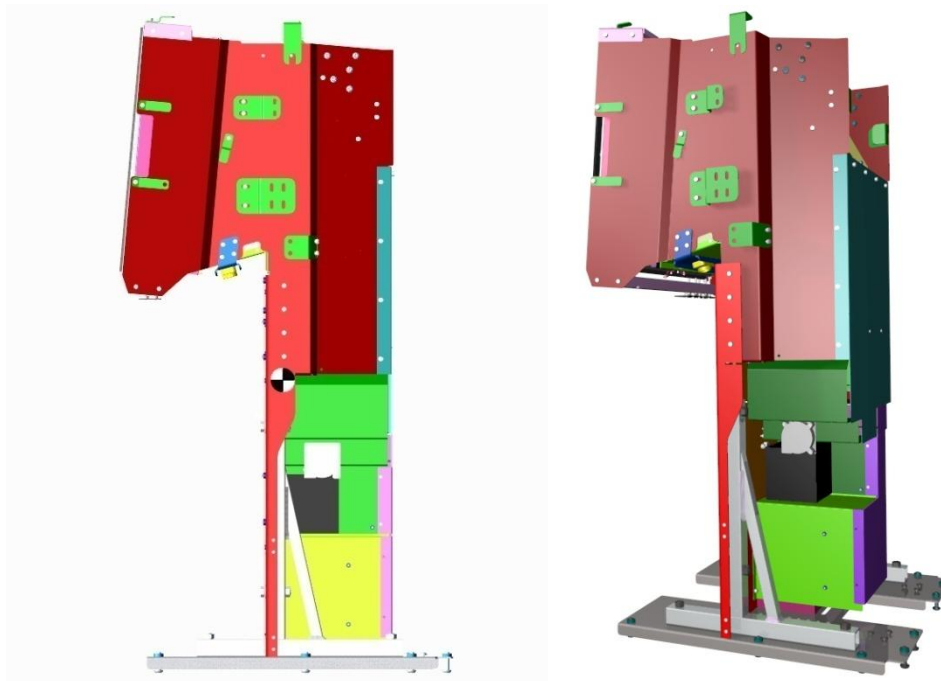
The figure to the left shows the centre of mass marked out in the assembly of the 3D screen body. To the right, the placements of the aluminum fixtures in the assembly are illustrated.
